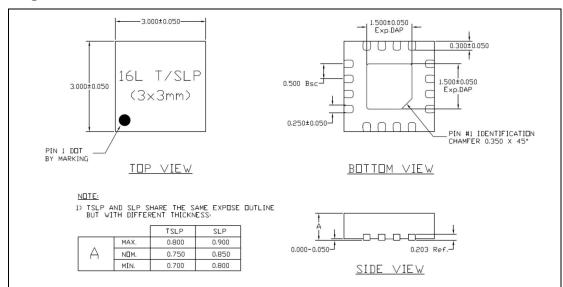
QFN package dimensions: $3.000 \times 3.000 \times 0.850$ mm, tolerance ± 0.050 mmm on all dimensions. Weight $0.022g \pm 10\%$
